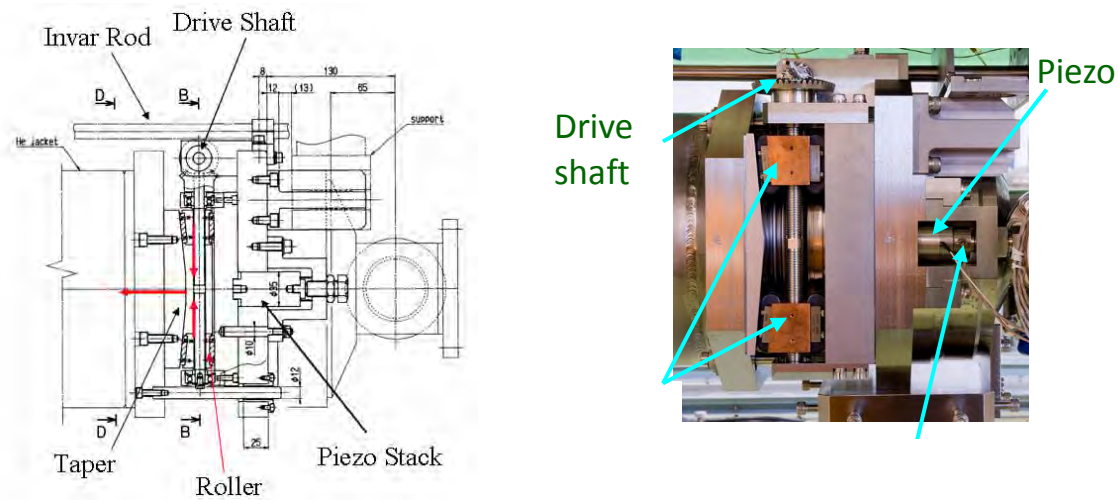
Schematic view (left) and photograph of slide-jack (right).
